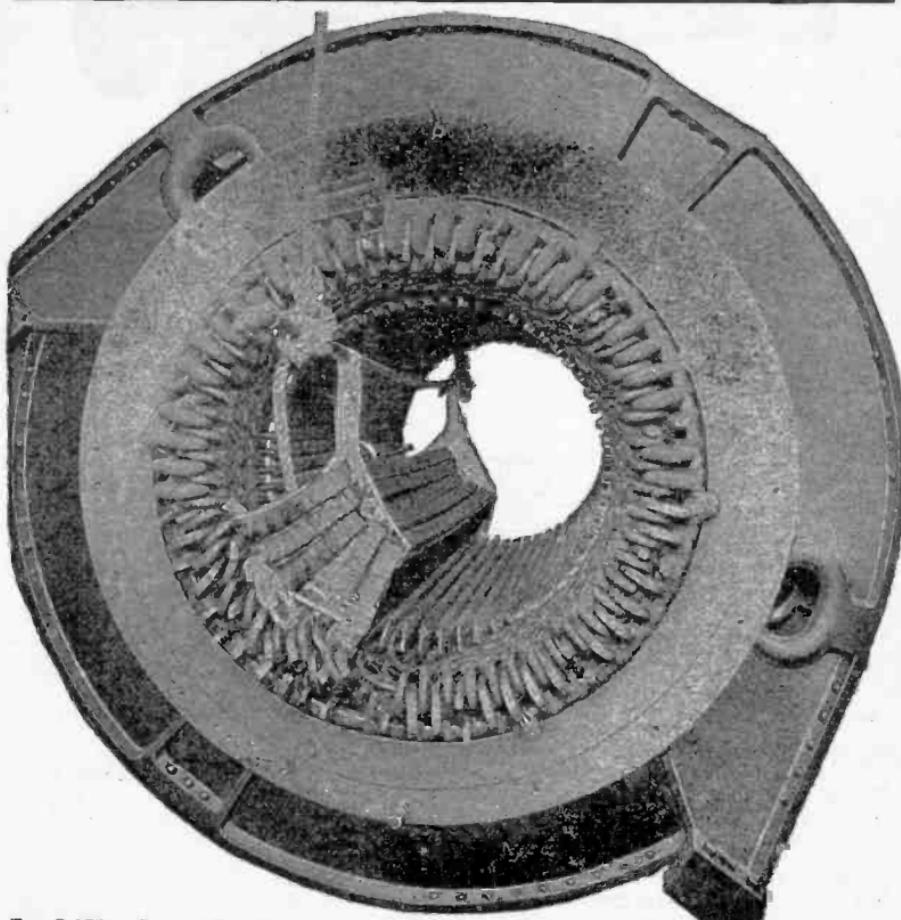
,155.—General Electric turbine alternator. End view showing end of armature winding and method of raising coils for inserting last coil.
